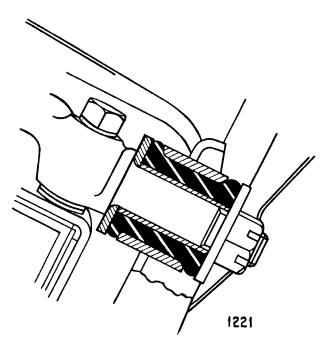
Section through one of the upper wishbone rubber steel mounting bushes.
